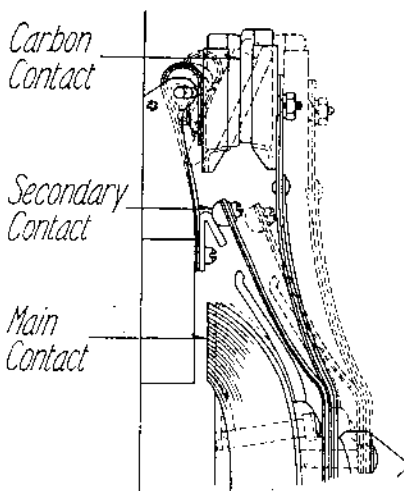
TYPE CL CARBON CIRCUIT-BREAKER CONTACTS
